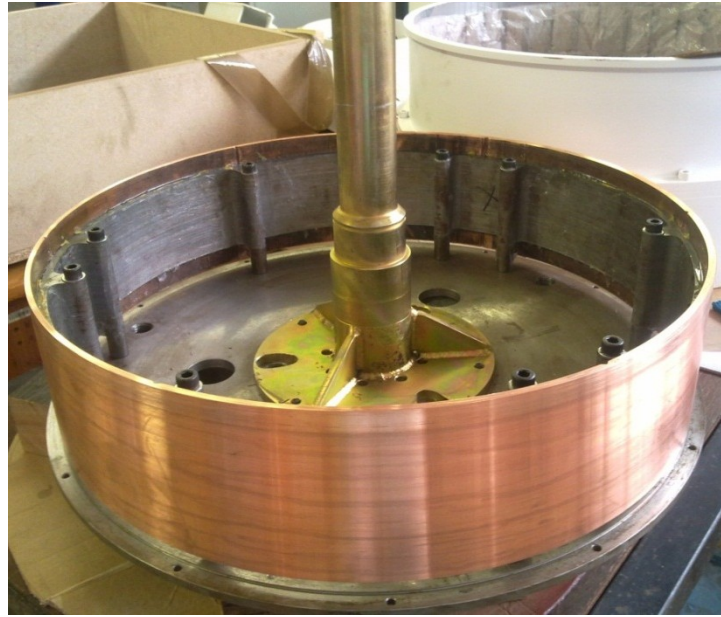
Manufactured and assembled slip rotor, including shaft and back plate
